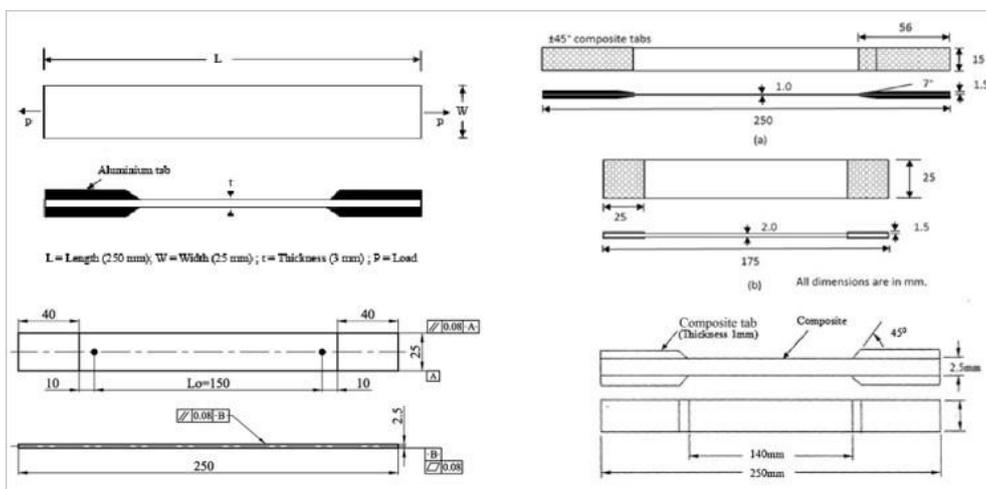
Composite tensile test specimens according to ASTM D 3039
